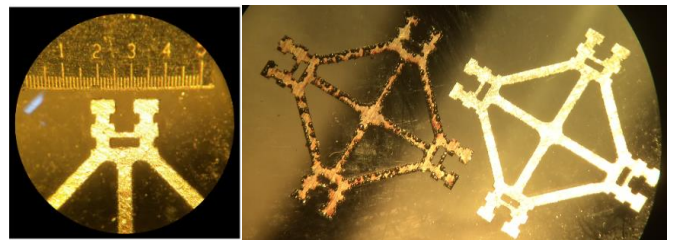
MANUFACTURING DETAILS. (L) JOINT TIP FEATURES, SCALE SHOWN IS IN MM. (R) BEFORE AND AFTER SLAG REMOVAL USING SAND PAPER.
